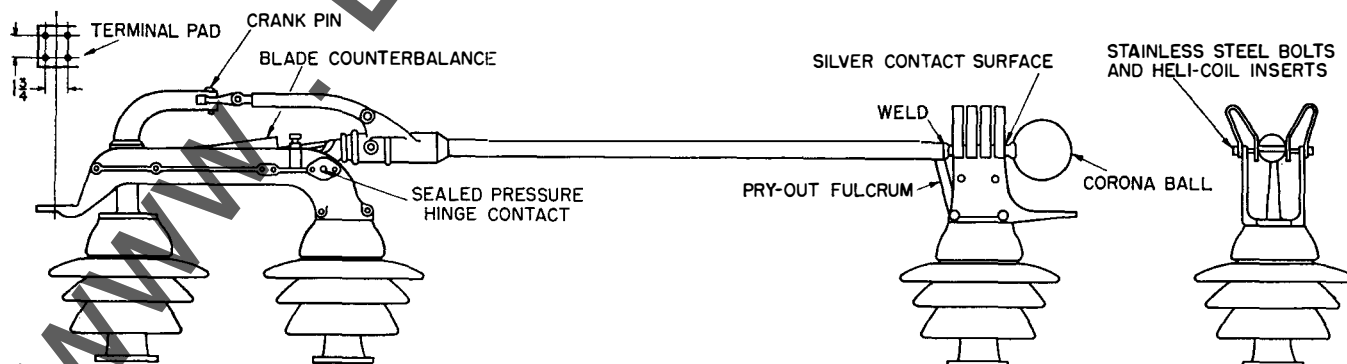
Assembly of current-carrying parts, 345-kv assembly shown.
